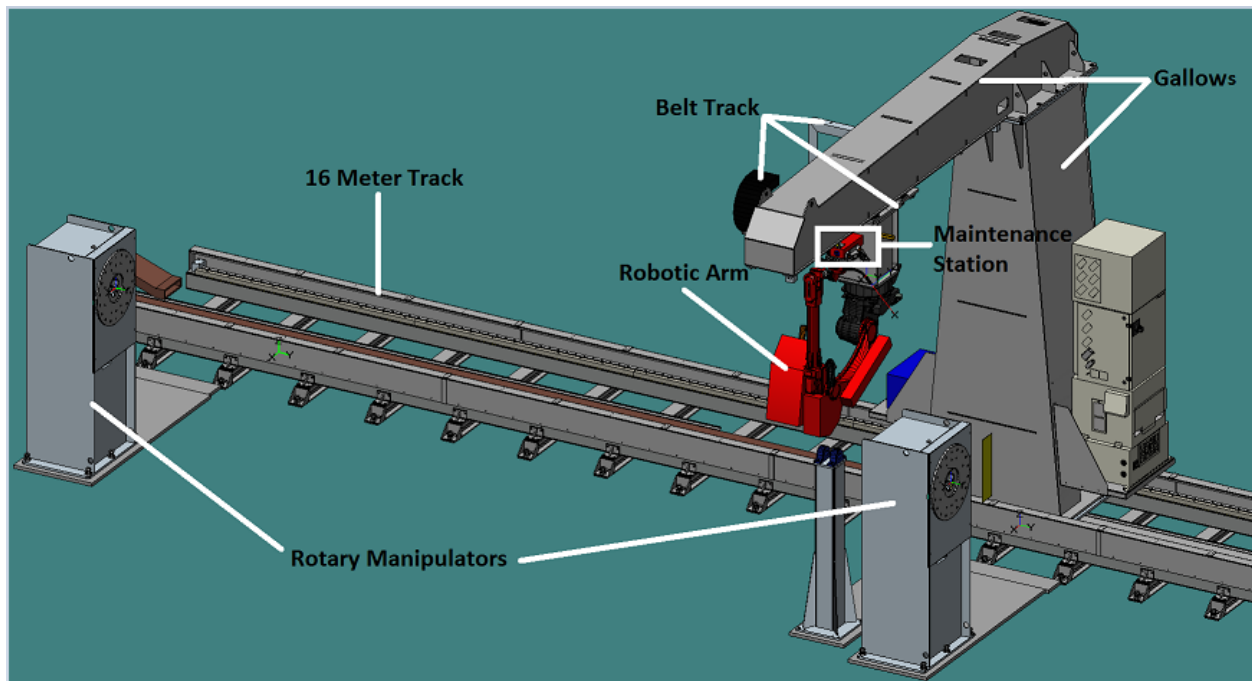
A representation of the components of the welding robot at ASN.
